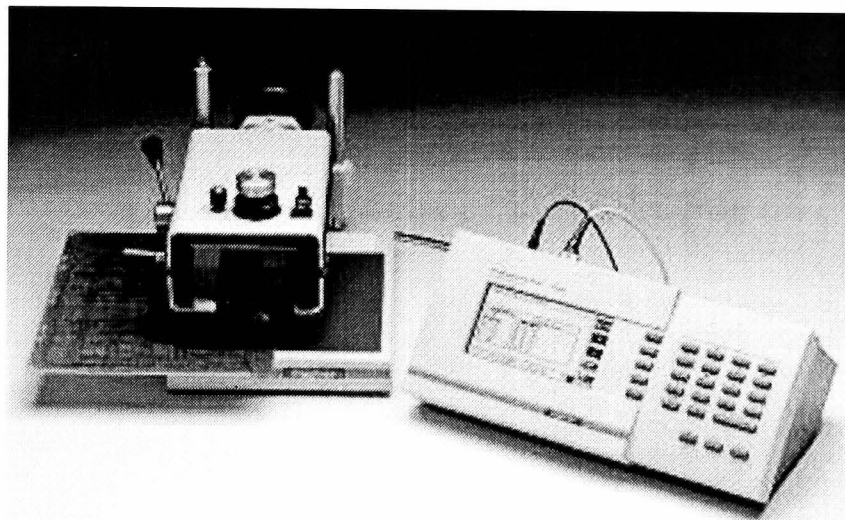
Measurement of electro deposited coatings on a PC-board
